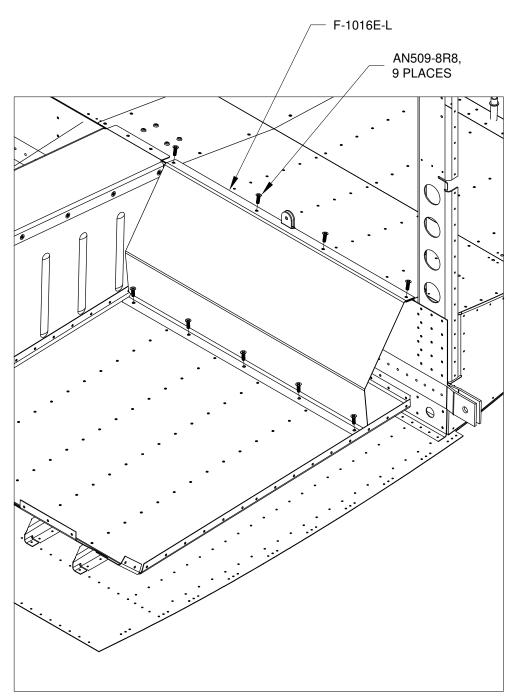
INSTALLING THE FLAP TORQUE TUBE COVER
